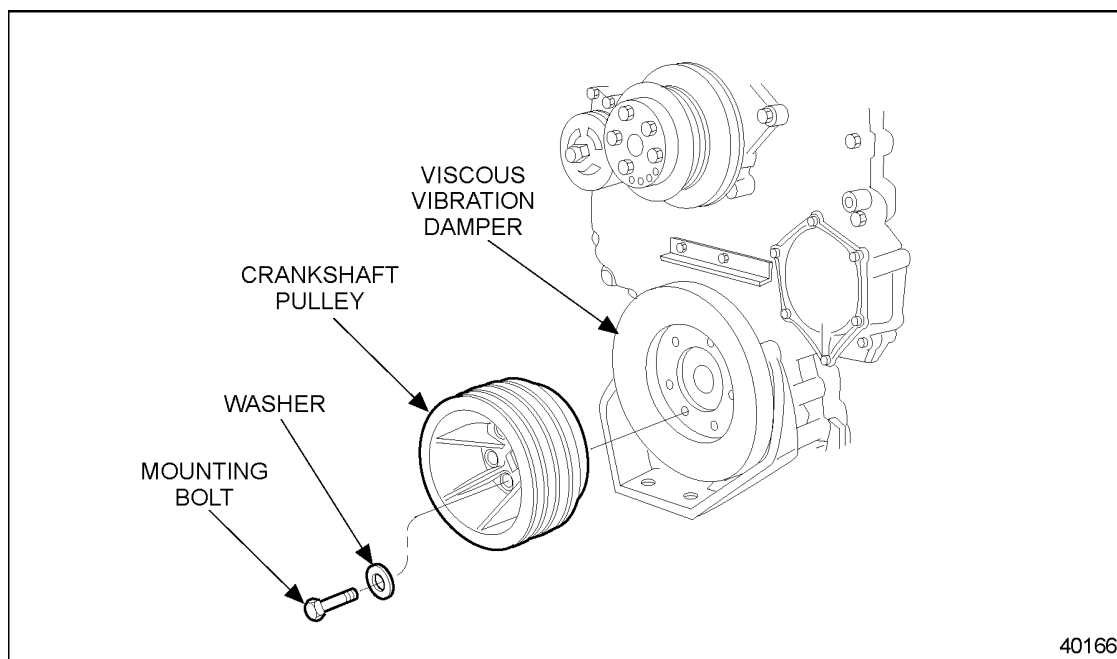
Crankshaft Pulley Mounted Directly to the Crankshaft
